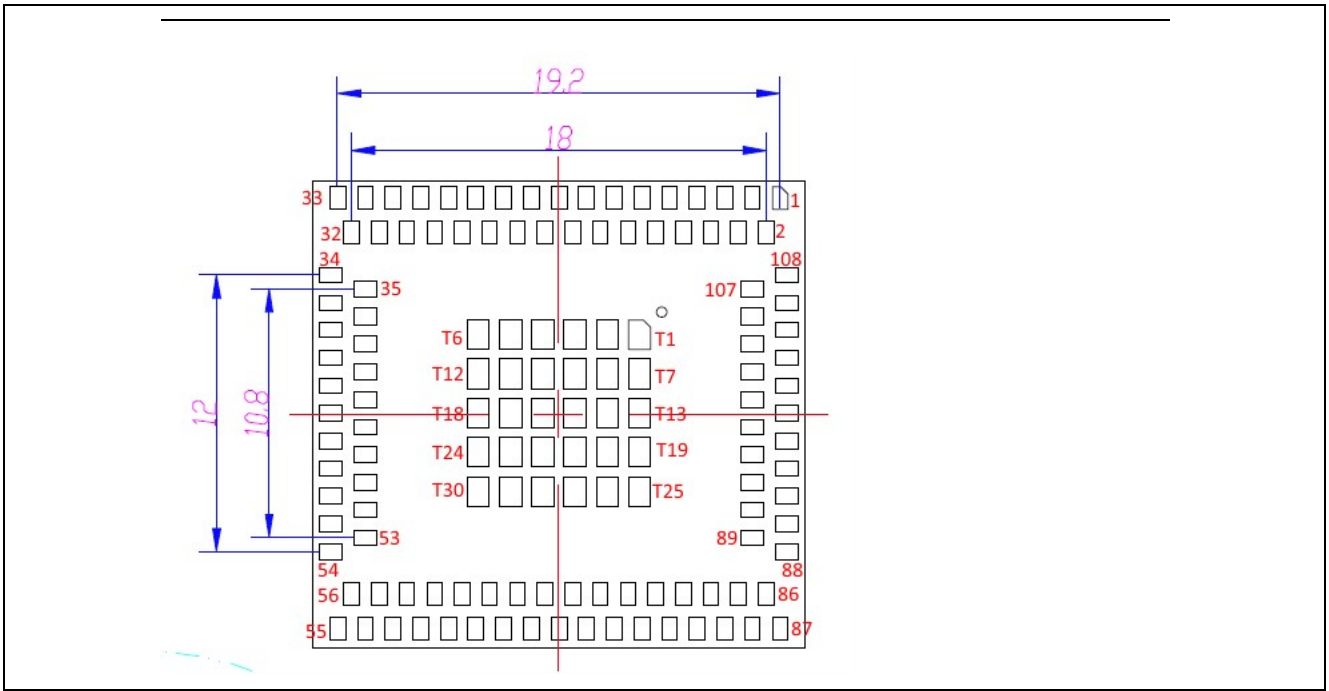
Module Bottom View, Dimensions and Pads Numbering (Module View)
